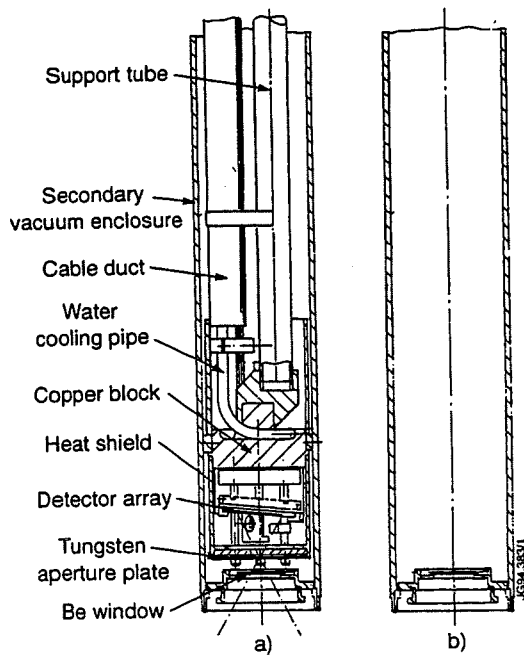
Camera head used in the single camera assembly. 3a shows the complete assembly. 3b shows the camera head retracted from secondary vacuum volume.
